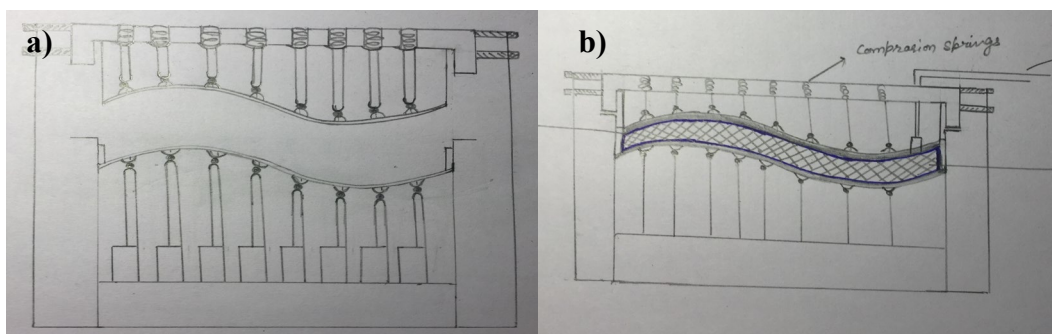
Drawing of Prototype Design a) open and b) closed (Drawn by Gurjar).
